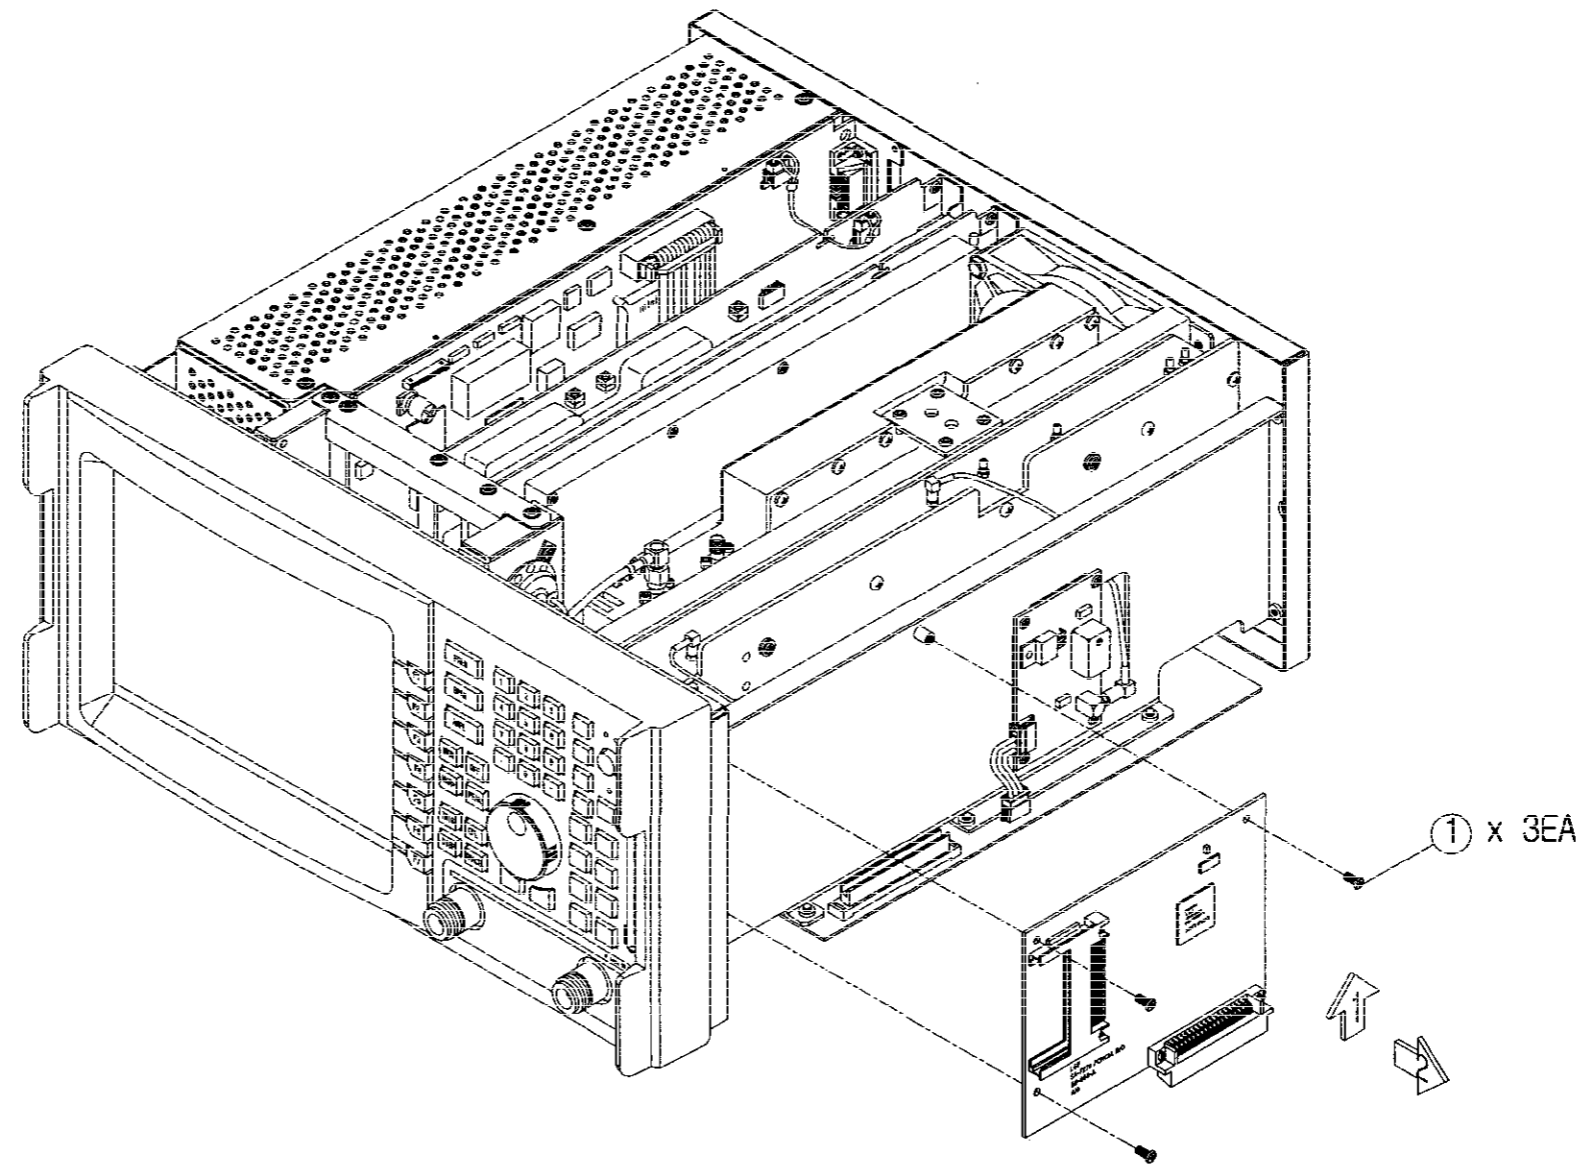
PCMCIA BOARD ASSEMBLY (OPTION)
